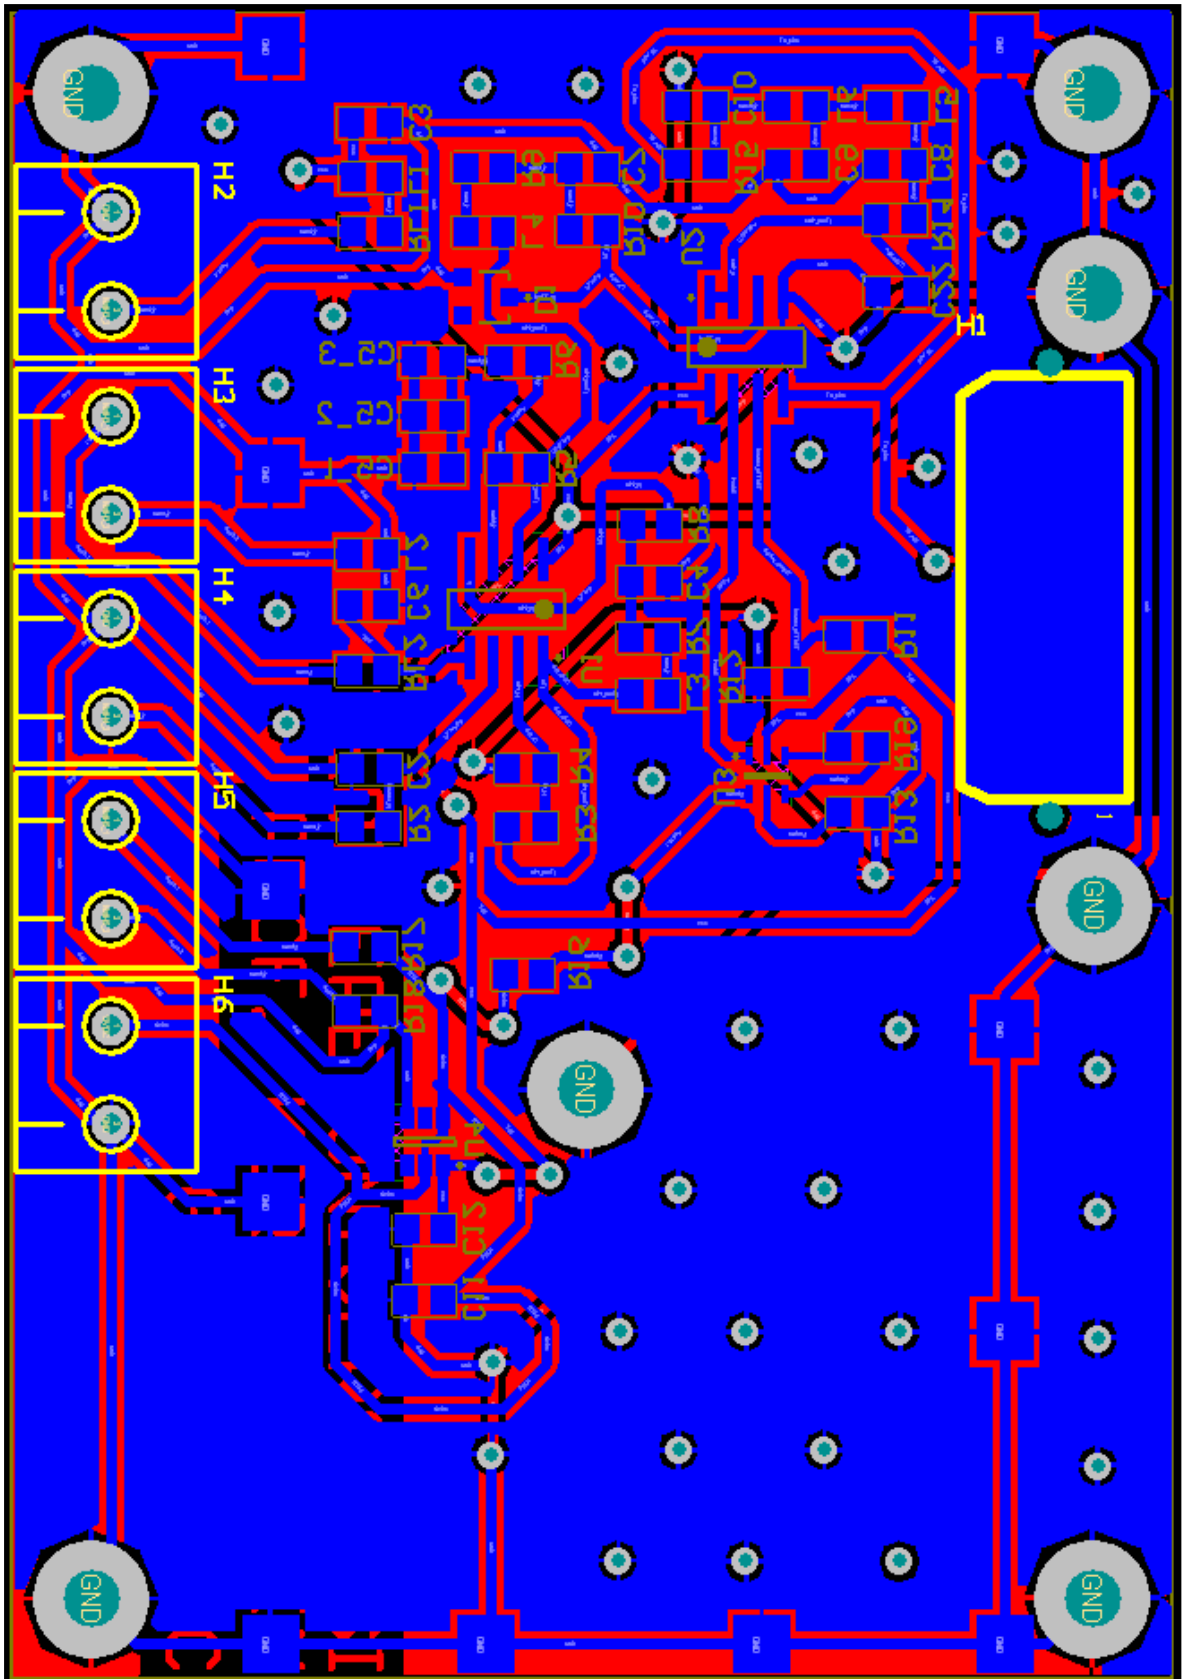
Screen capture of bottom view sensor board pcb (Altium)
